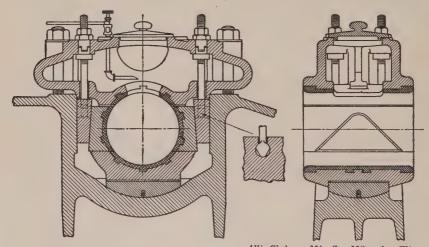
Split Adjustable Conical Sleeve Bearing.
